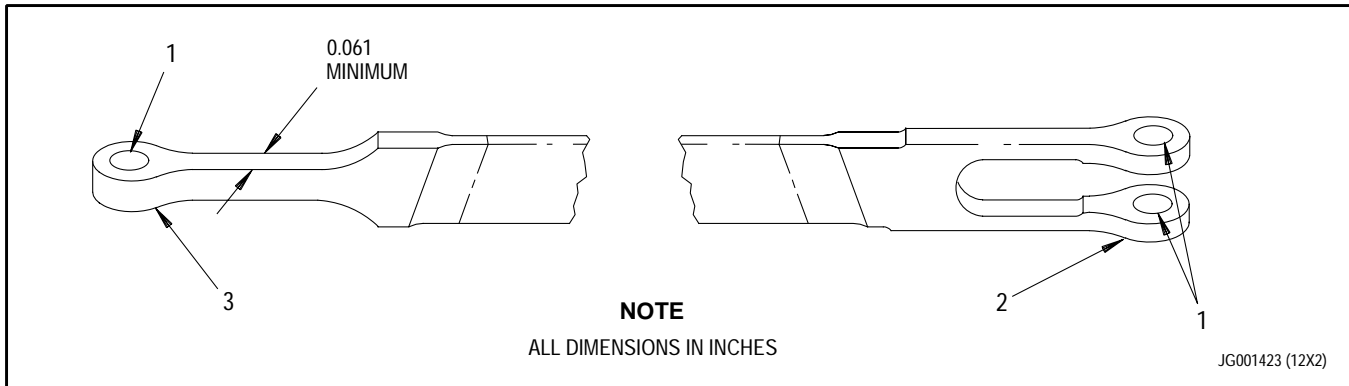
Bleed Valve Strap Assembly - Blend Repair
